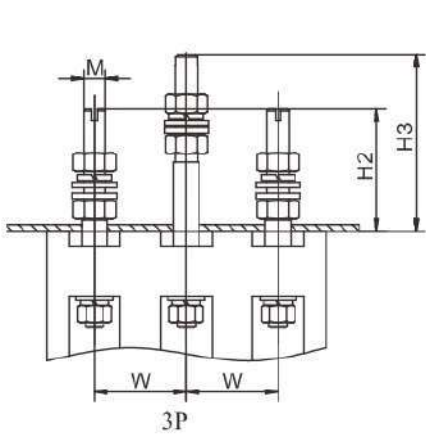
Back board wiring shape and installation size of EXM3-160 board
